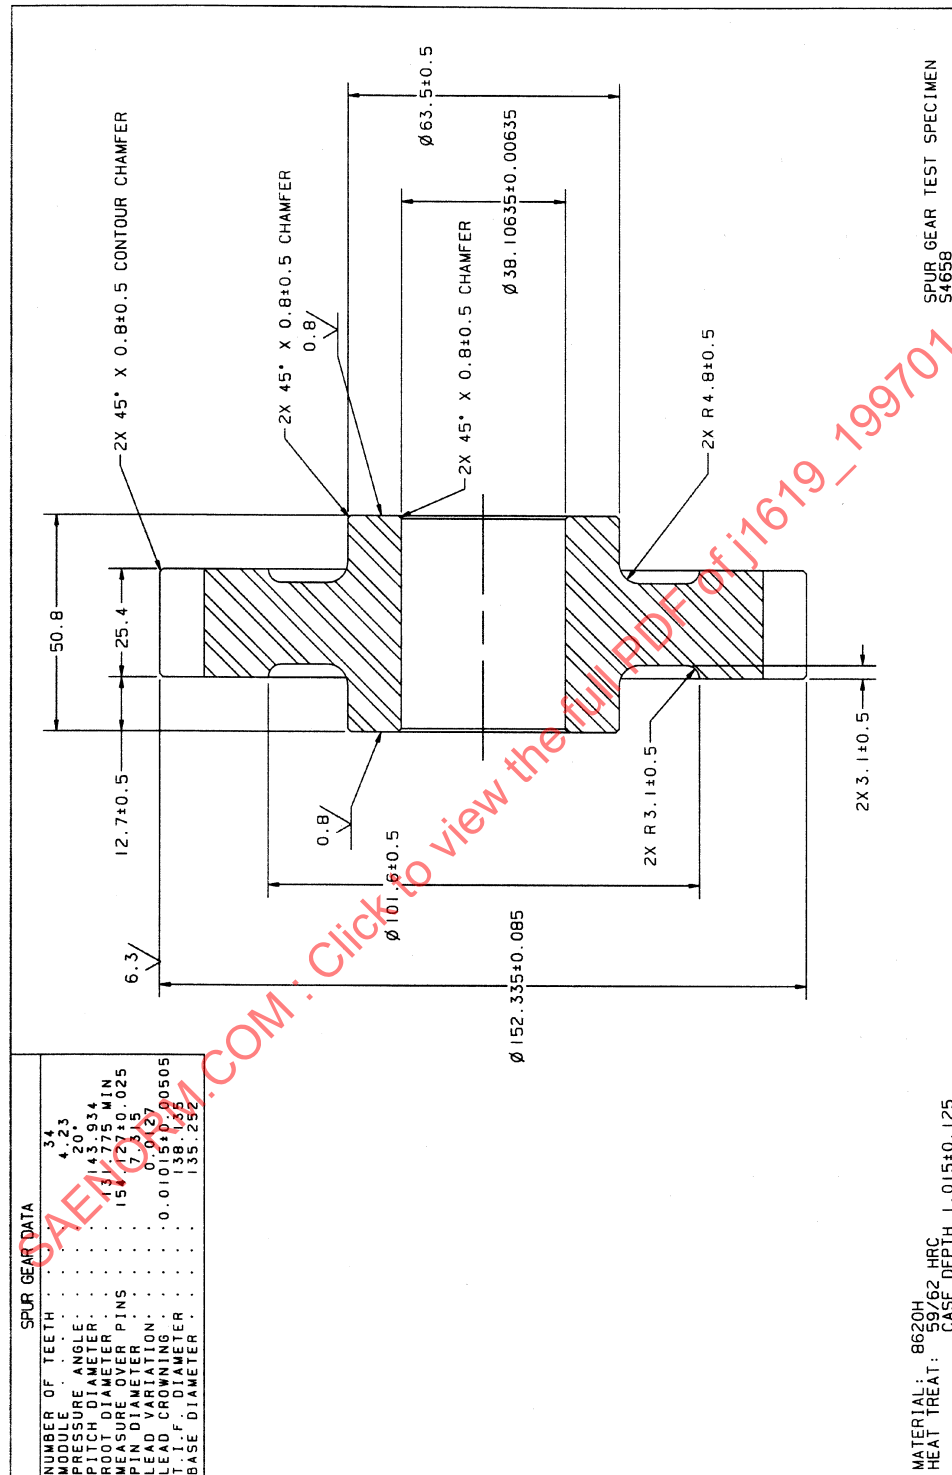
A—SPUR GEAR TEST SPECIMEN
